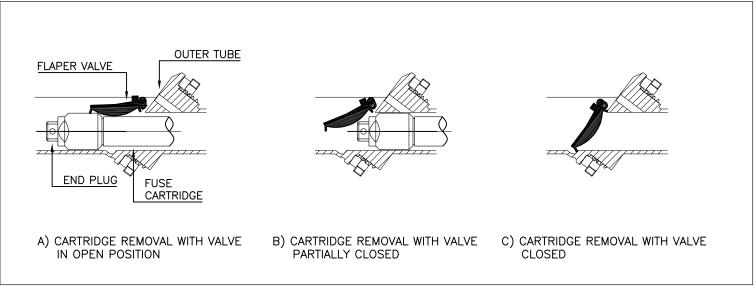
Illustration of Flapper Valve Operation during removal of Inner Fuse Holder.
